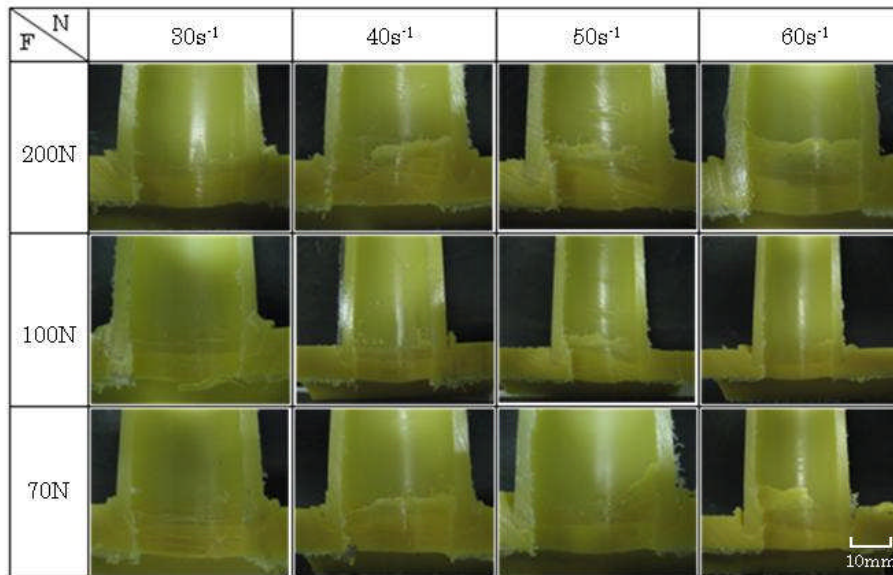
Appearance of longitudinal section of branch pipe friction welded joint.
